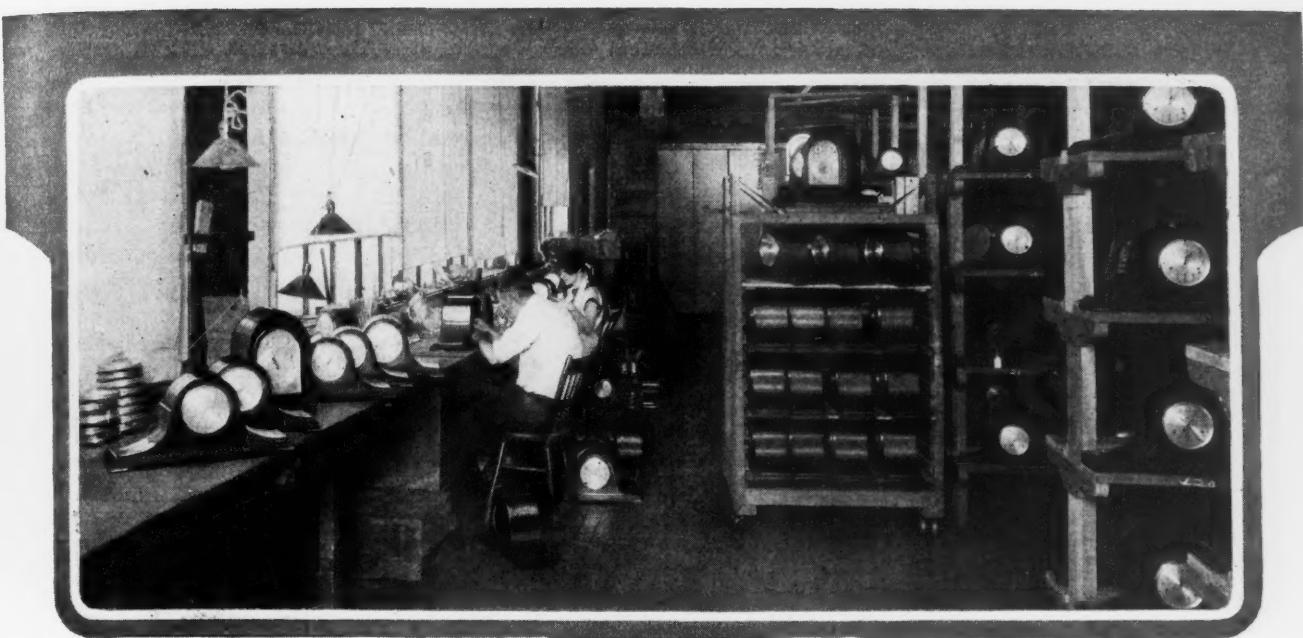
A Final Assembly in the Manufacture of Chime Clocks
